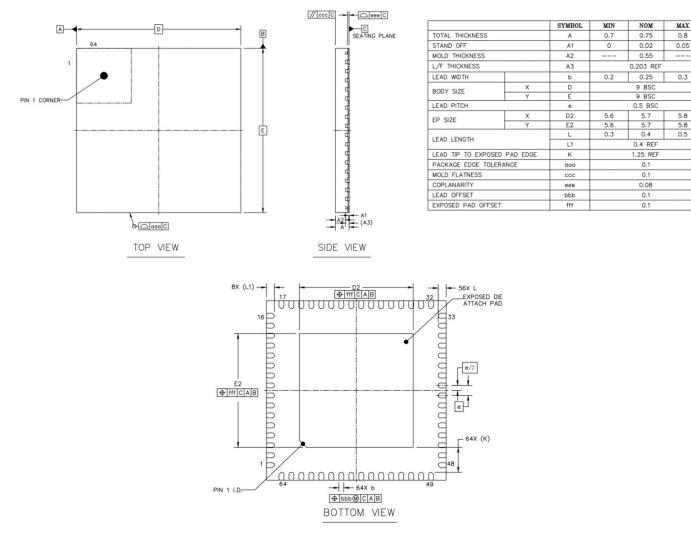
64 Pin QFN (Dimension shown in millimeter)
